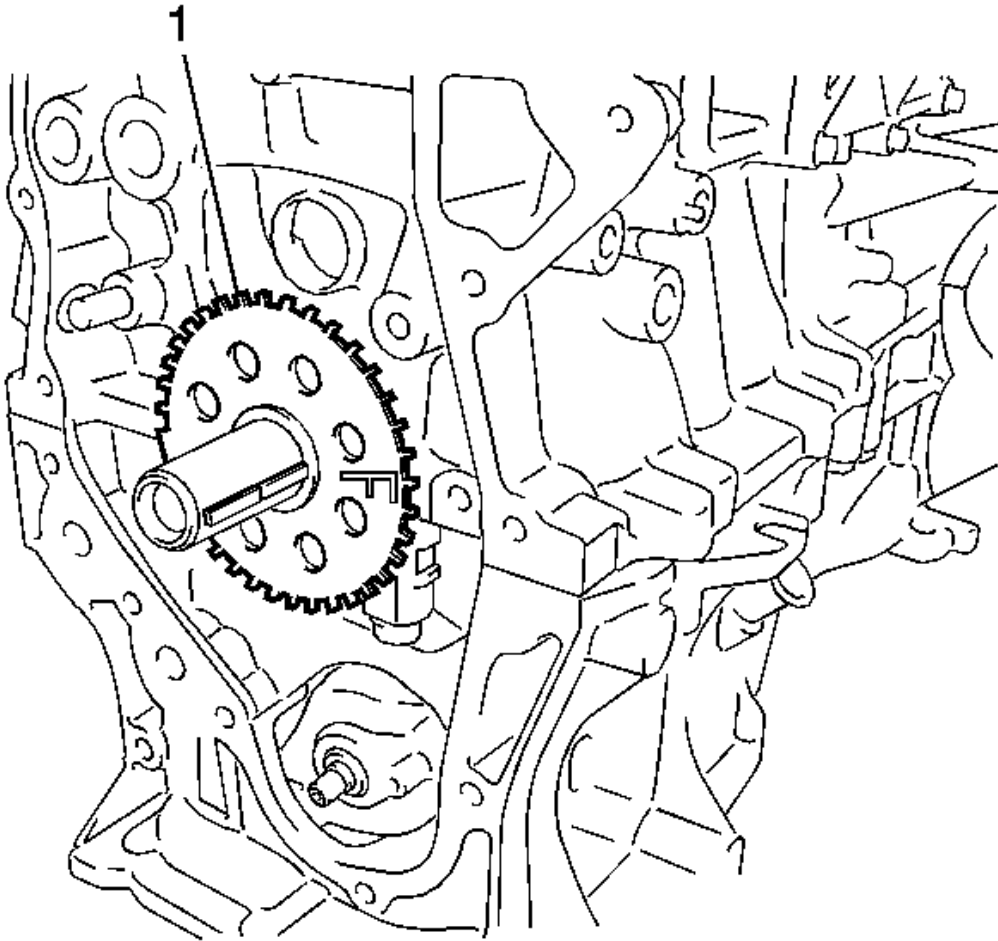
Identifying No. 1 Crankshaft Position Sensor Plate
